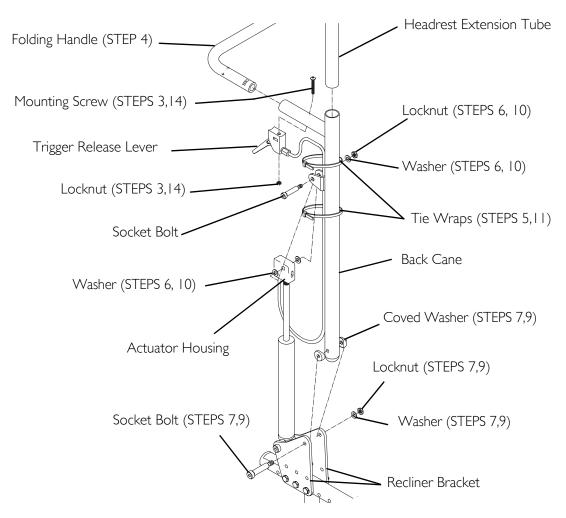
Adjusting Back Height - Recliner Backs
